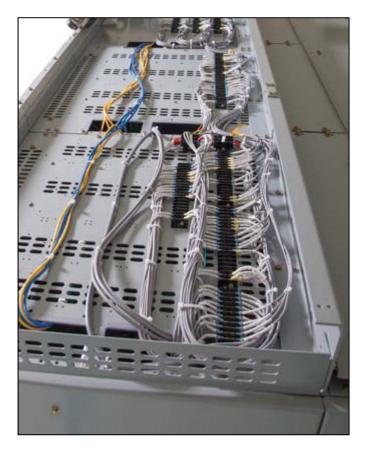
Interconnect control wiring and Ethernet cables in the wiring trough on top of the equipment
